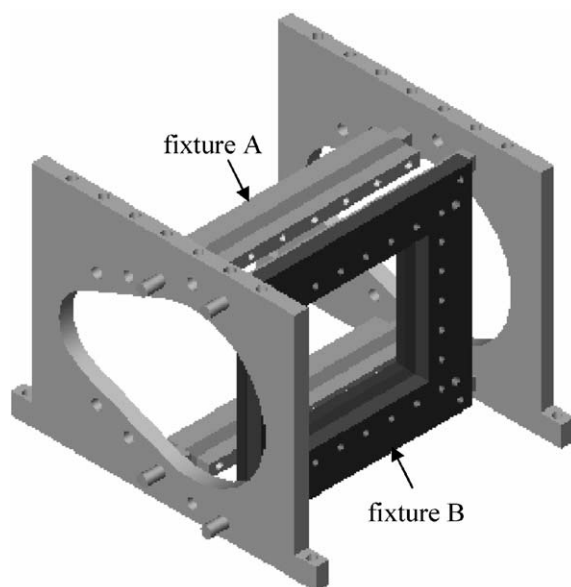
Sketch of fixture for mounting fabric targets; fixture A for two-clamped-edges and fixture B for four-clamped-edges.
